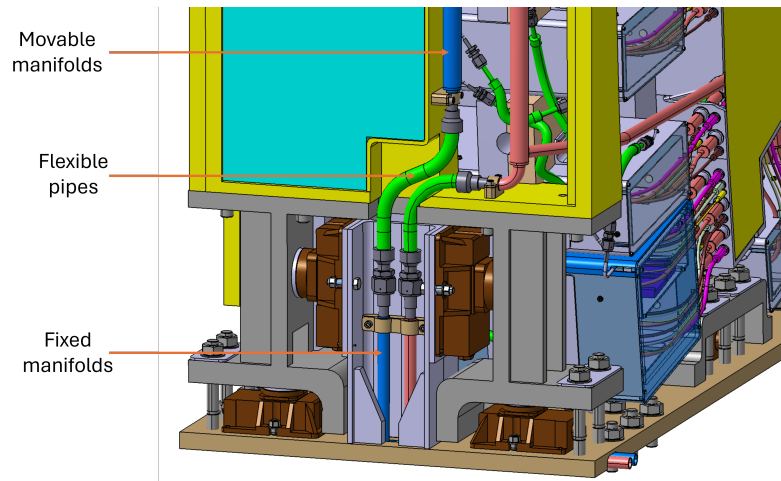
Details on the new manifolds layout on the bottom connection area ([80]).
